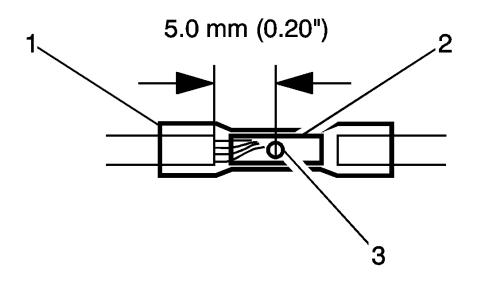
Identifying Duraseal Splice Sleeve Courtesy of GENERAL MOTORS COMPANY
